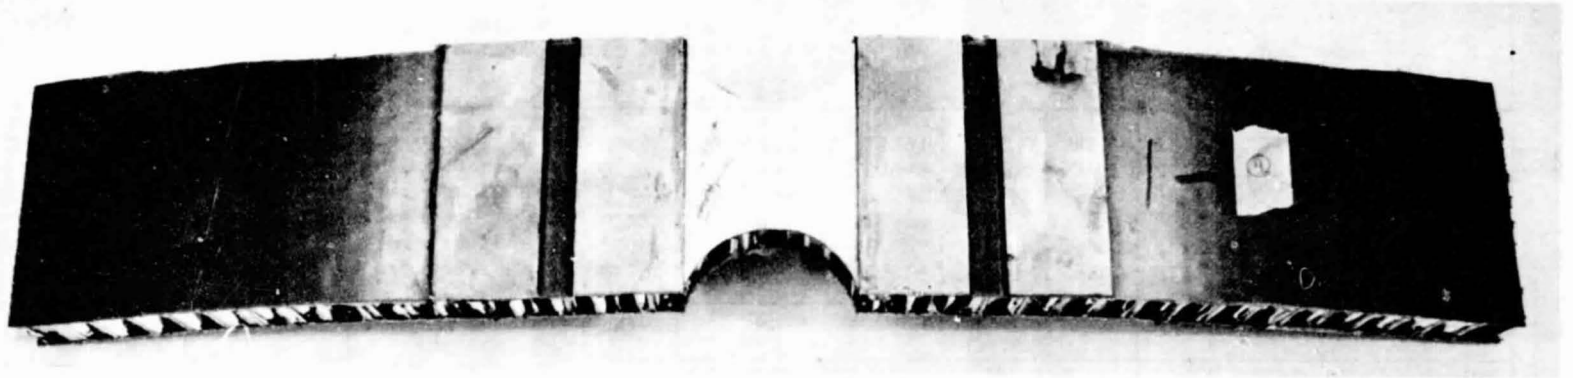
Failed Specimens of Inlet Wall Curved Sandwich Panels.
